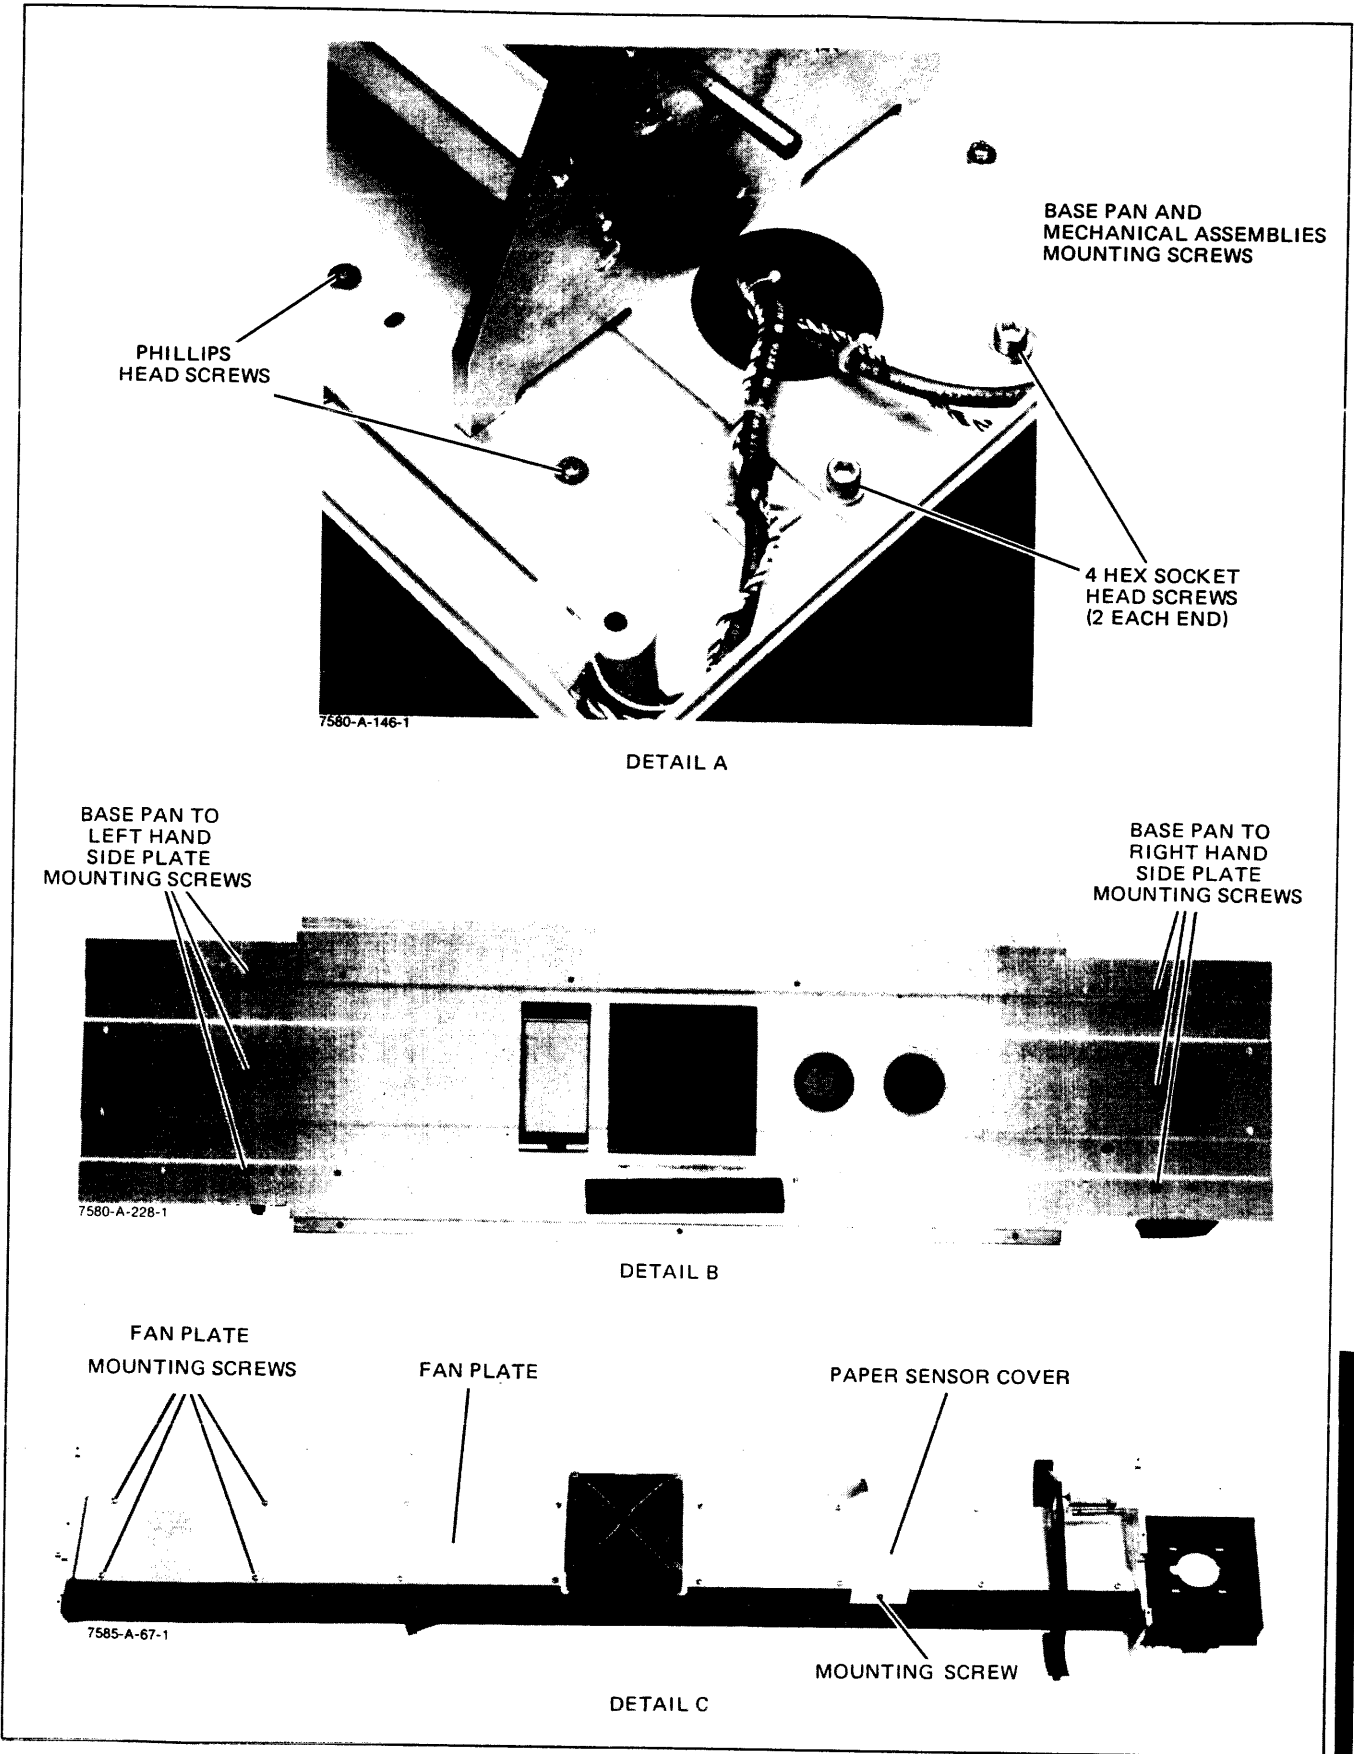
Grit Wheel Replacement (Sheet 1 of 2)
